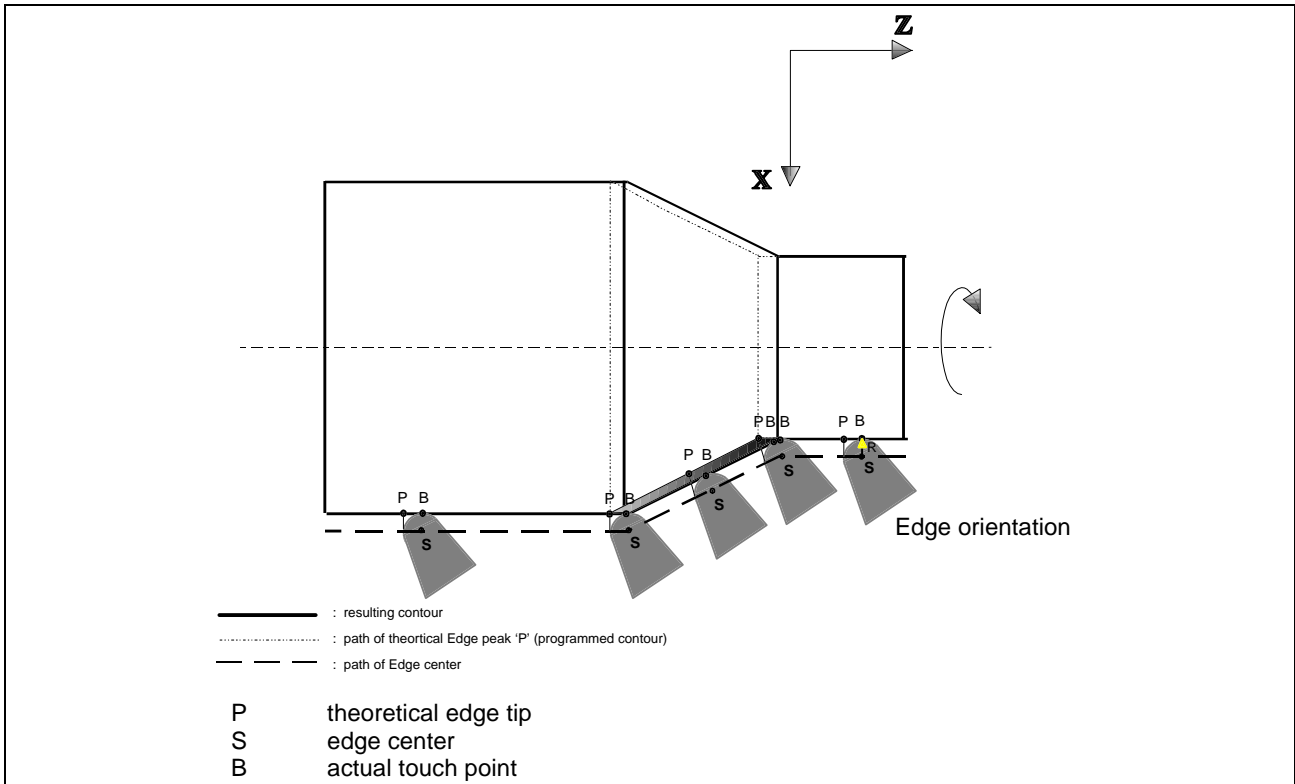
Errors which will result if machining is performed without using tool edge radius path compensation
